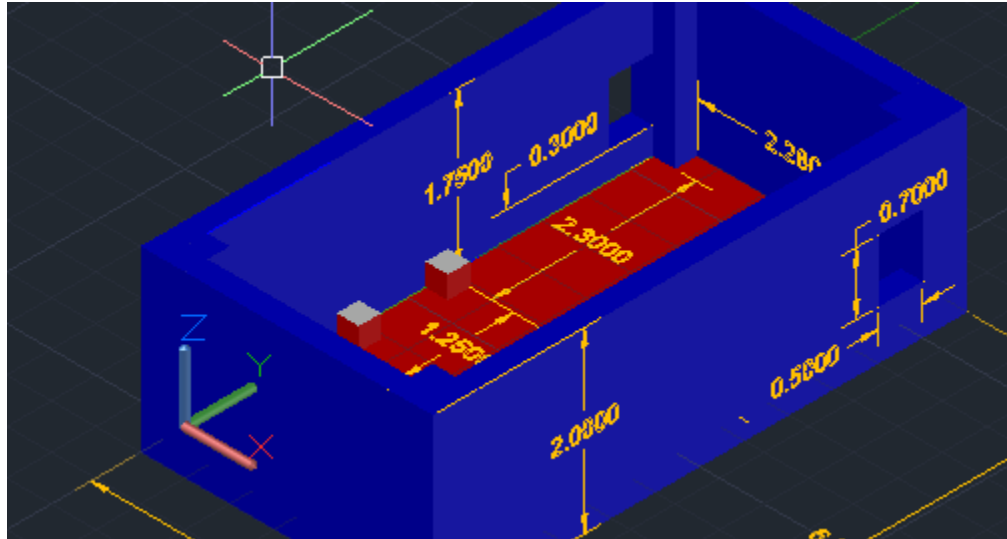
Side-view Cad drawing of the Gadget
